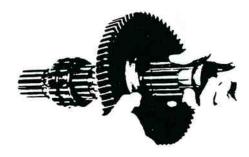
Removing 2nd Speed Gear and Spacer.
